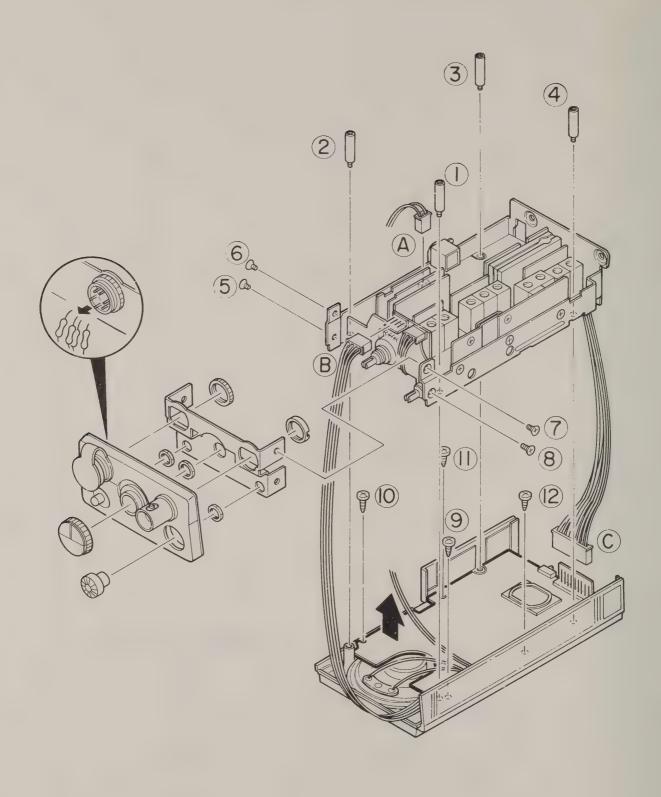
HX200SII CHASSIS ASSEMBLY
